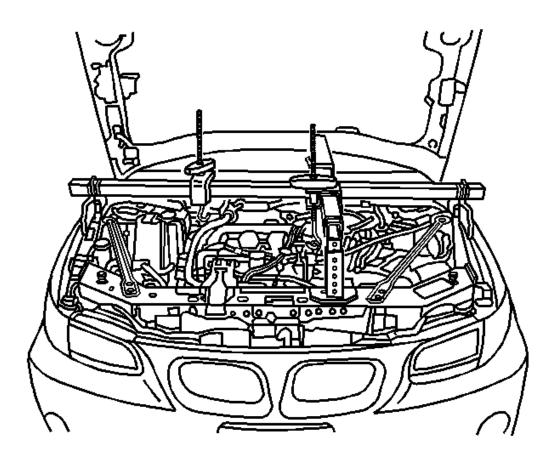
Raising Engine Courtesy of GENERAL MOTORS CORP.
